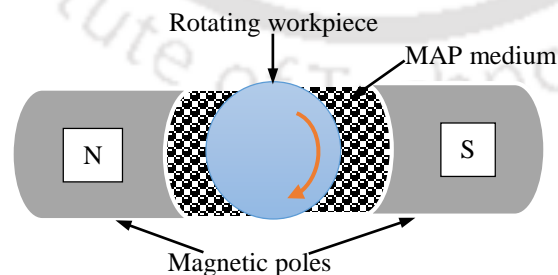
Finishing of cylindrical workpiece using MAF
